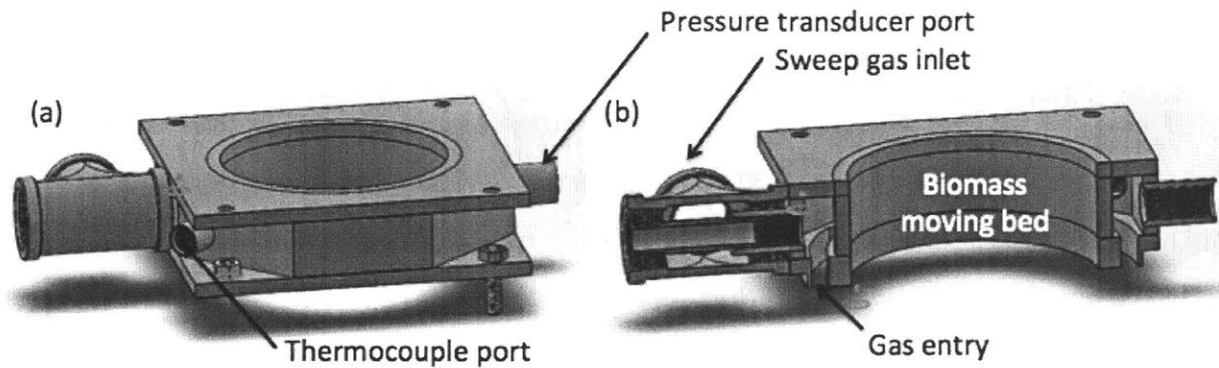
(a) SolidWorks rendering and (b) cutaway view of the lower gas sampling port component.
